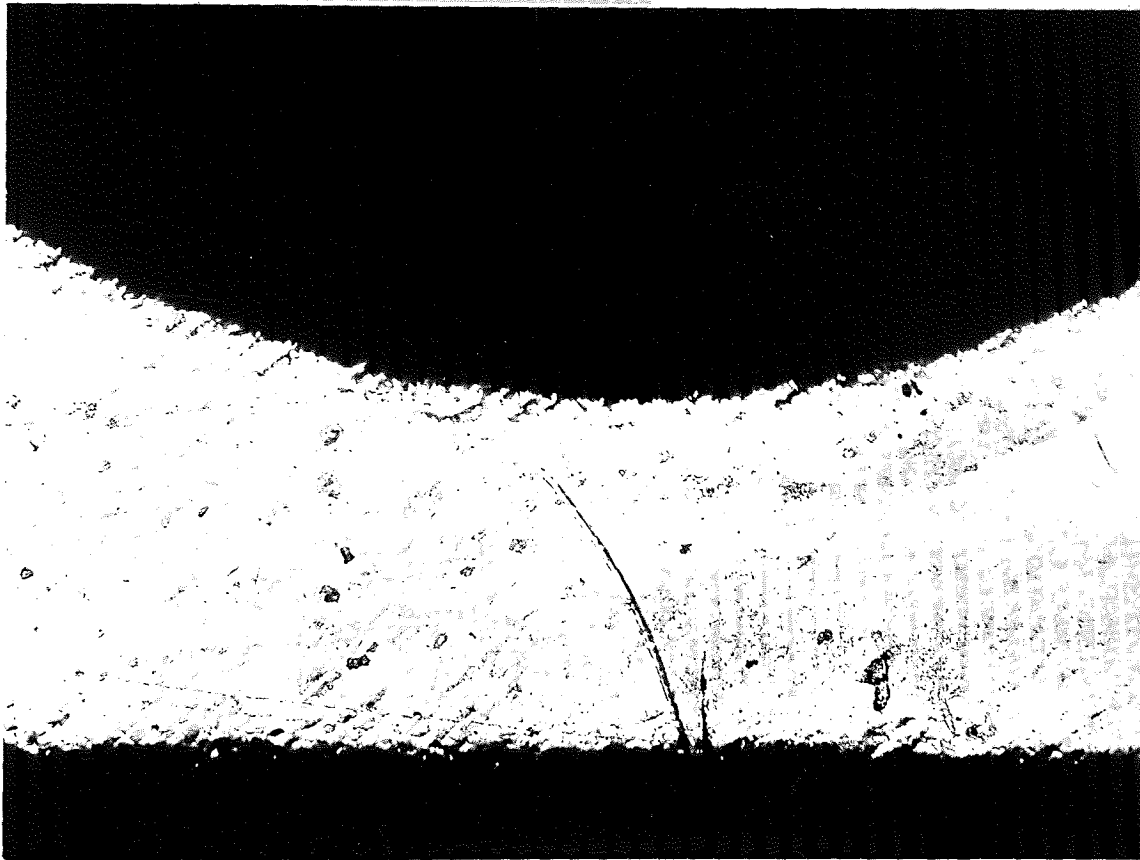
80X, Hole region of nickel silver contact spring after deburring.
